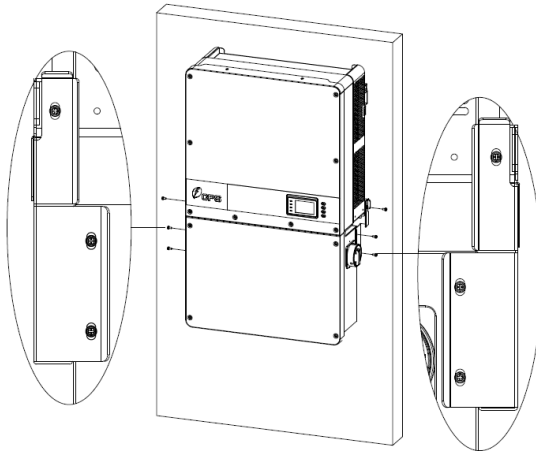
Secure the Main Enclosure and Wiring Box to the Bracket
